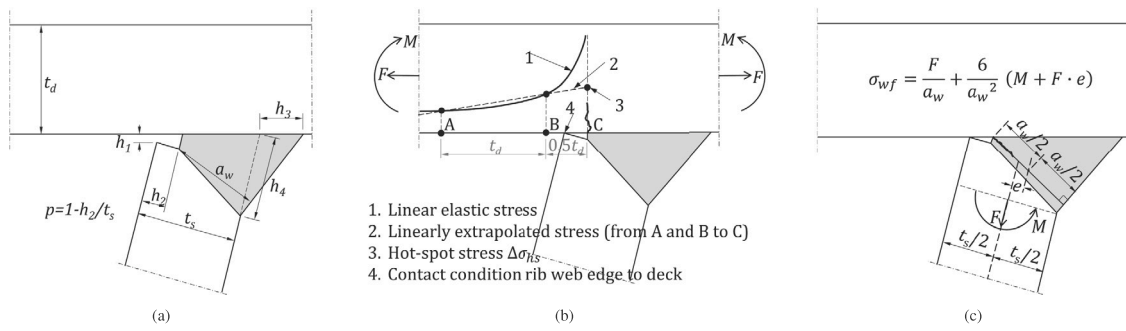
Rib to deck weld: (a) Geometrical definitions; (b) Hot-spot stress definition for deck plate cracks from the weld root; (c) Weld stress definition for weld cracks from the weld root.
